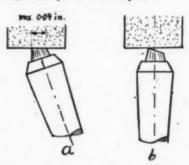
a and b-Readjustment of a diamond tool towards the surface of the grinding wheel.
